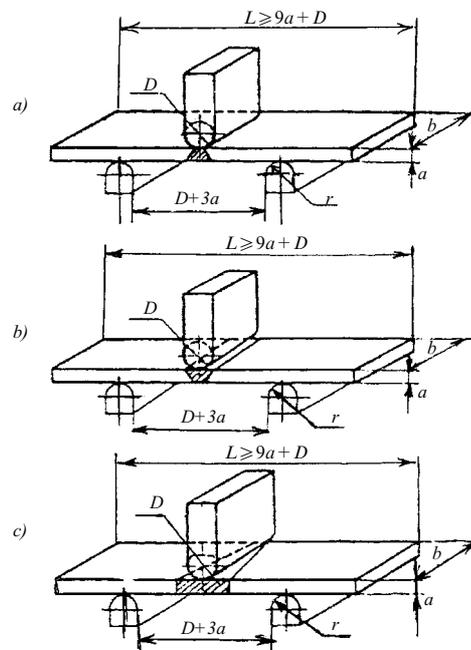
Dimensions of test specimens from the test pieces of the butt plate joints (P_1) and butt pipe joints (P_3 , P_5 and P_6), and the diagram of the static face-bend test (a), root-bend test (b) and side-bend test (c)
